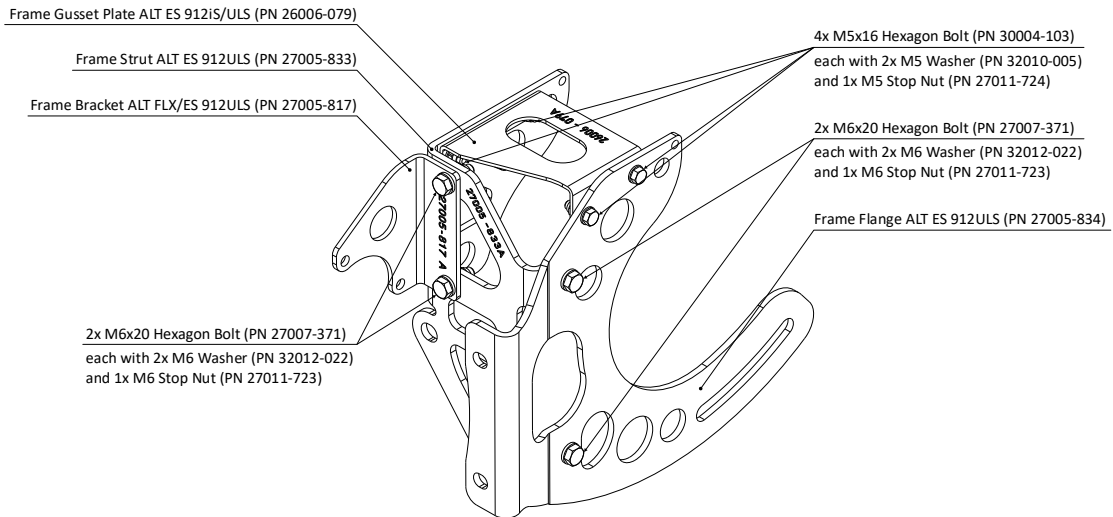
Isometric View Ext. Alternator Kit 70A Rotax 912ULS Frames
